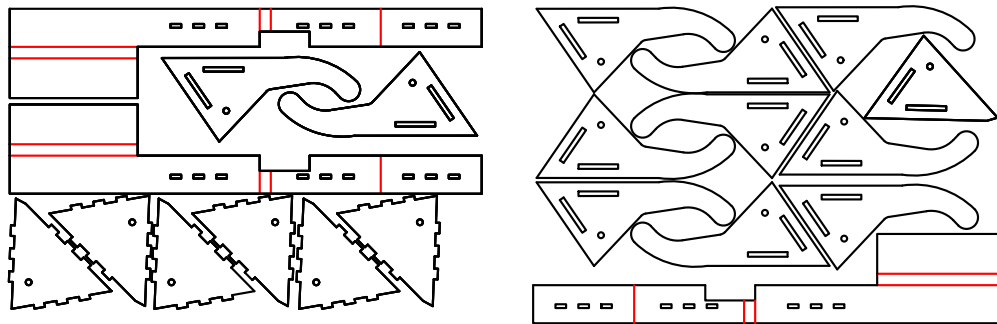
Examples of printing pattern clusters for parts fabrication.
